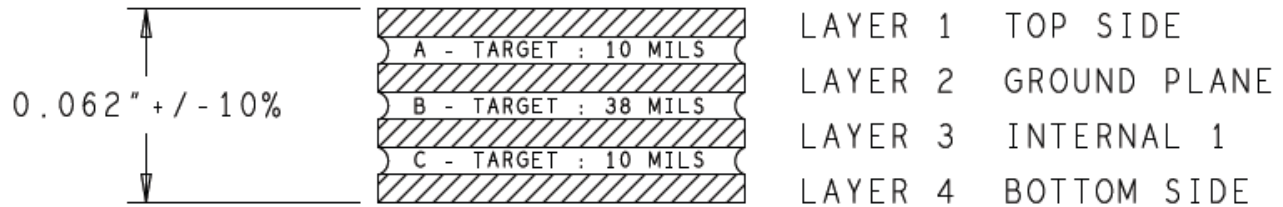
FRDM-KW24D512 PCB stackup cross-section (four layer)
